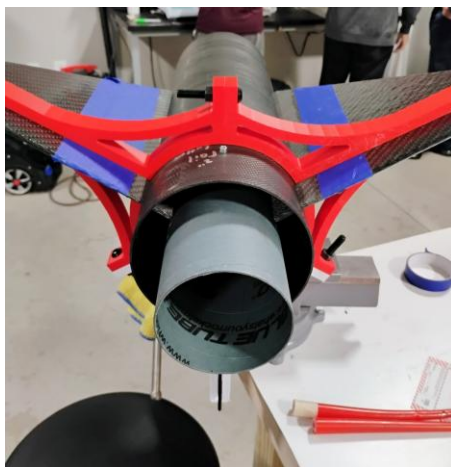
Fin construction setup for epoxying fins to motor tube with internal fillets
